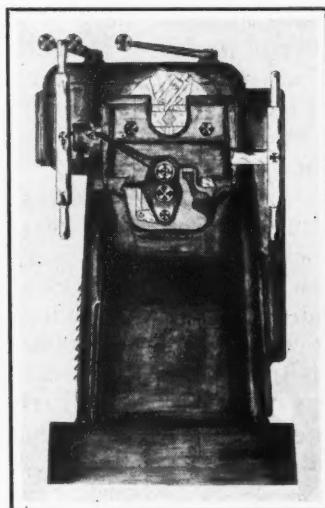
End View of Machine Shown in Fig. 1. Note how Shading Brings out the Important Details
